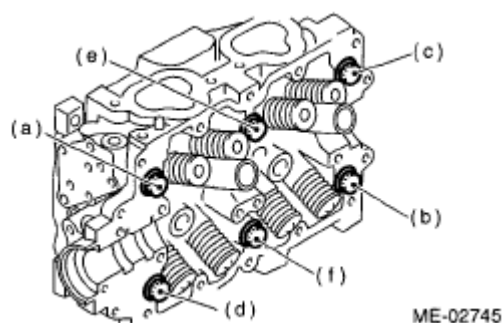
Identifying Cylinder Head Bolts Removal Sequence
